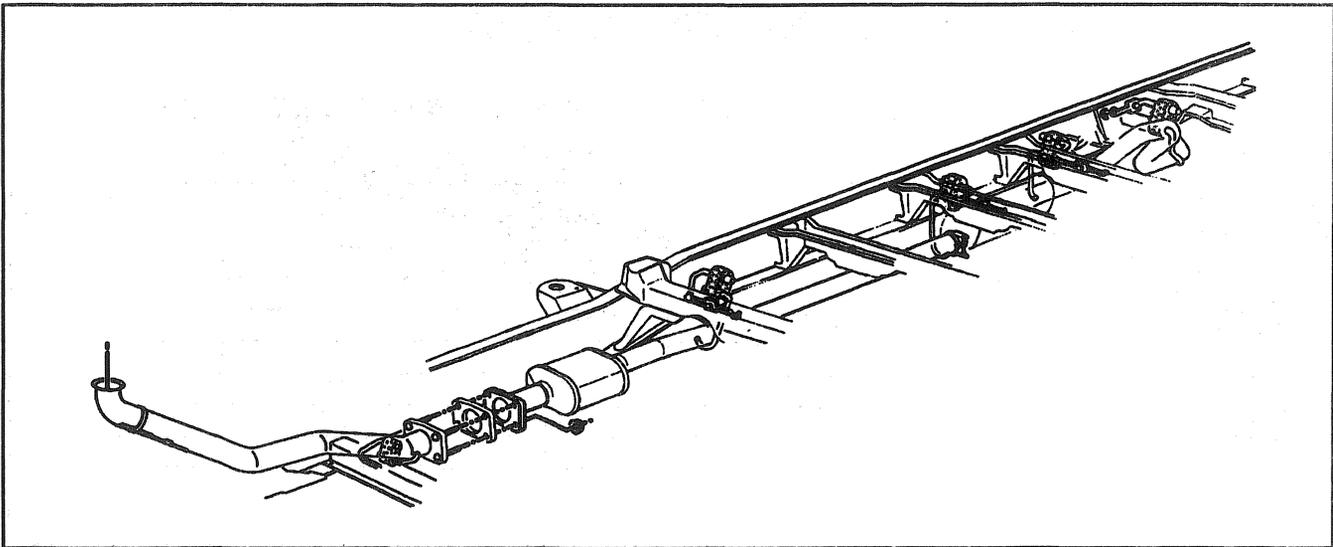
Exhaust System - C 318 Cab Chassis w/6.5L Diesel Engine
